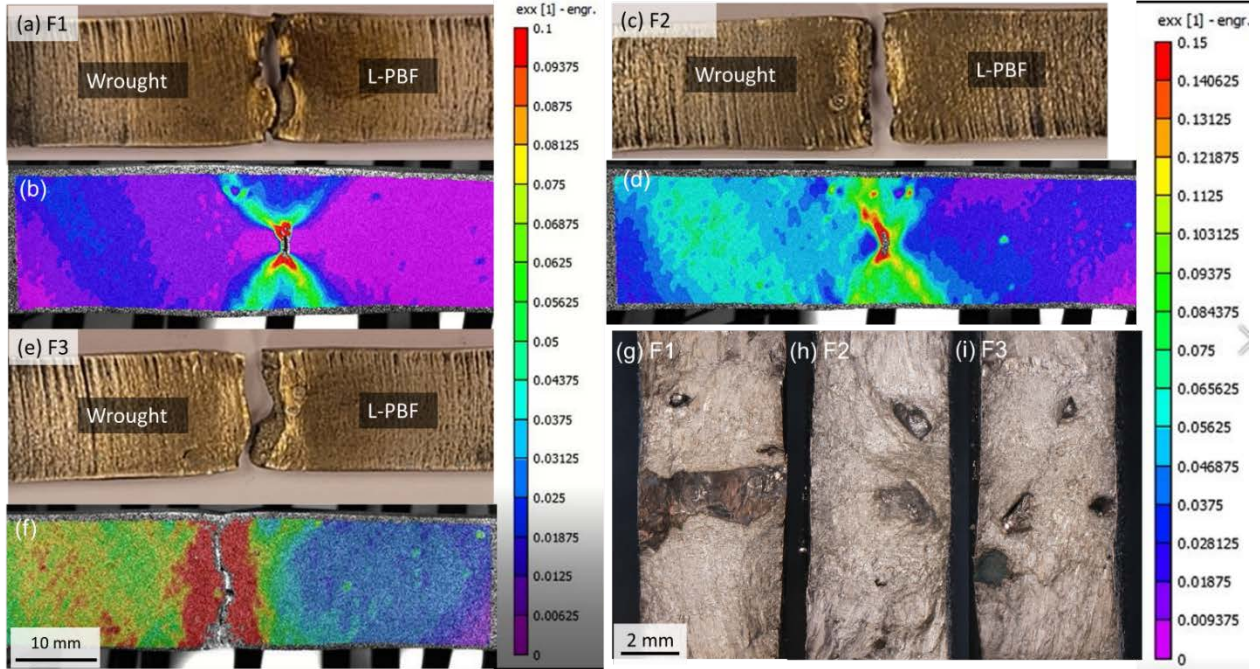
500°C tensile test DIC results (a–b) F1 fracture location DIC engineering strain map, (c–d) F2 fracture location DIC engineering strain map, (e–f) F3 fracture location DIC engineering strain map, and (g–i) respective fracture surfaces
